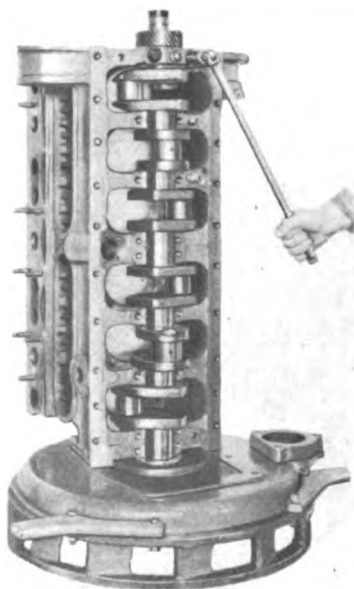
Removing Nuts from Crankshaft Flywheel Studs
